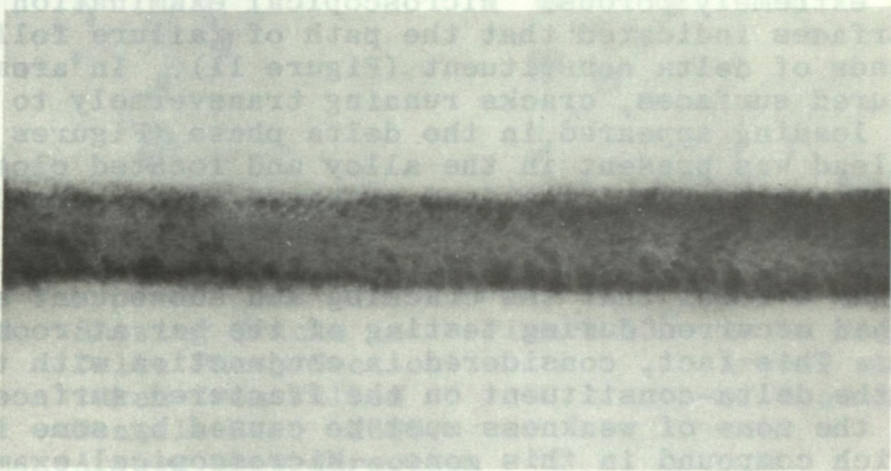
Positive X-ray Print Showing Porosity in Weld Made with IX Filler Wire.
